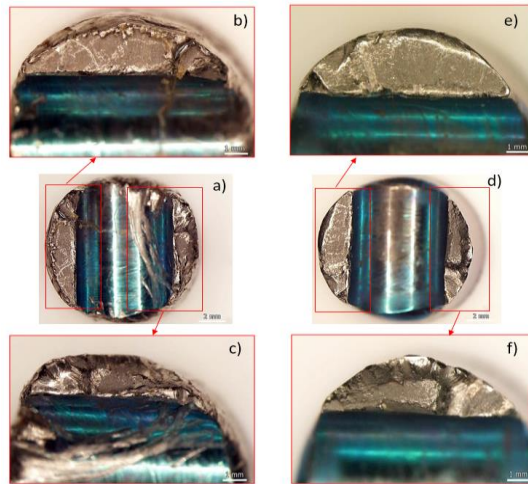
Fractographic images of the fracture surfaces a) overview of the fracture area of the first part c, d) details of the fracture surface associated with figure a); d) overview of the breaking area of the other part; e, f) details of the breaking surface associated with figure d)
